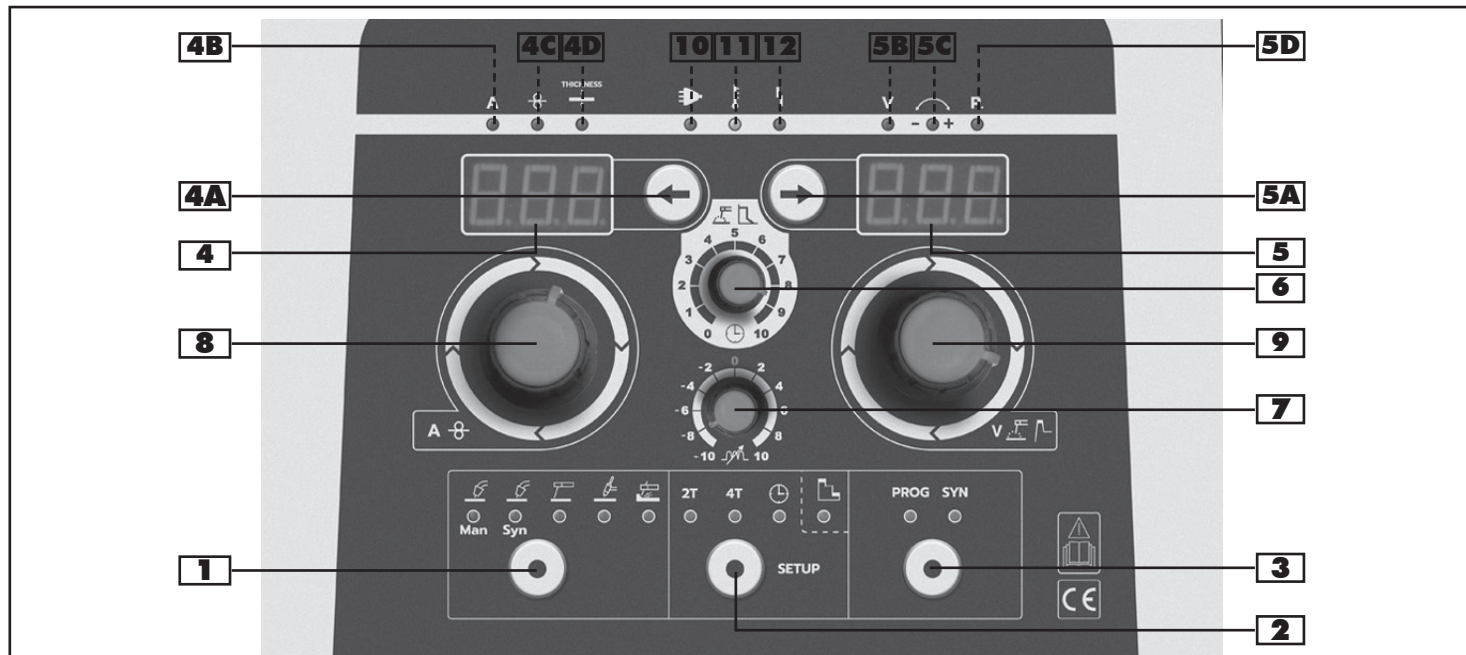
Control Panel of the Wire Feeder and of the Compact Welding unit - Front A
